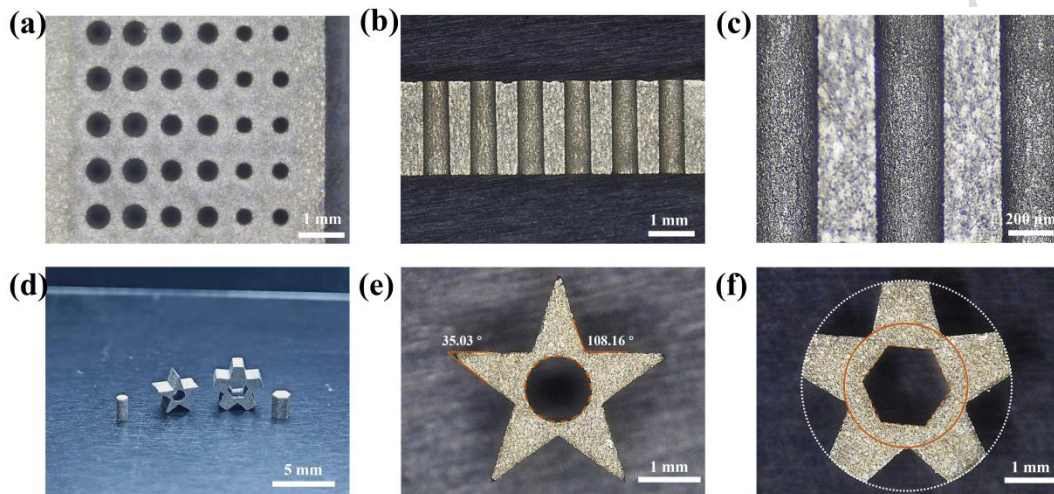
Hole array and pattern machining results. (a) Optical image of the hole array on NbMoTaW sheet. (b–c) Profile of drilling channels at low and high magnification. (d–f) Optical images of the pattern machined samples.
